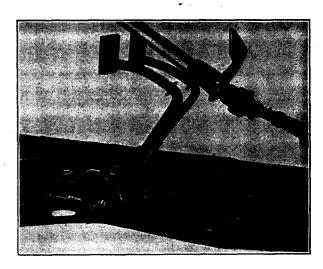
View of V-8 Pedal Assembly showing installation of master brake cylinder and clutch connections
